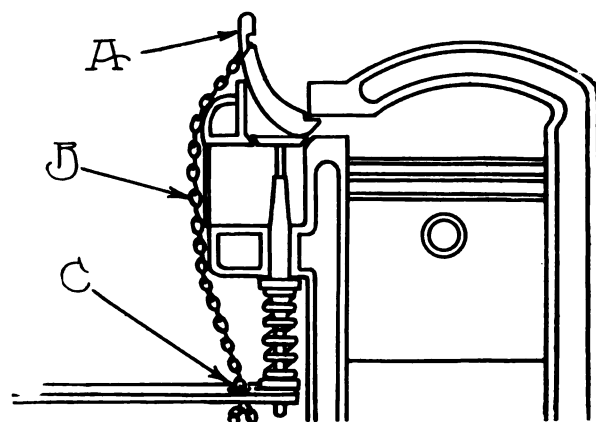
How to Construct and Operate a Valve Spring Compressor.
